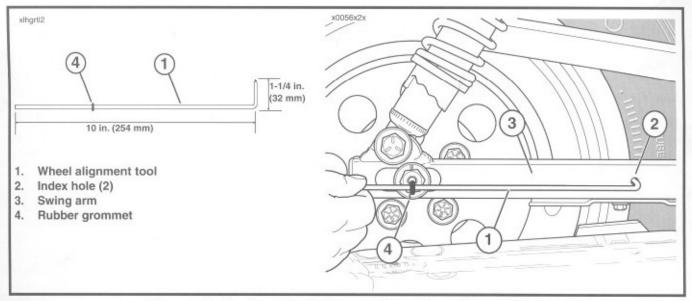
Checking Wheel Alignment Using Wheel Alignment Tool
